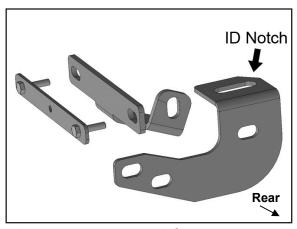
Attach passenger/right #3 Mounting Bracket to threaded hole and Support Bracket.
